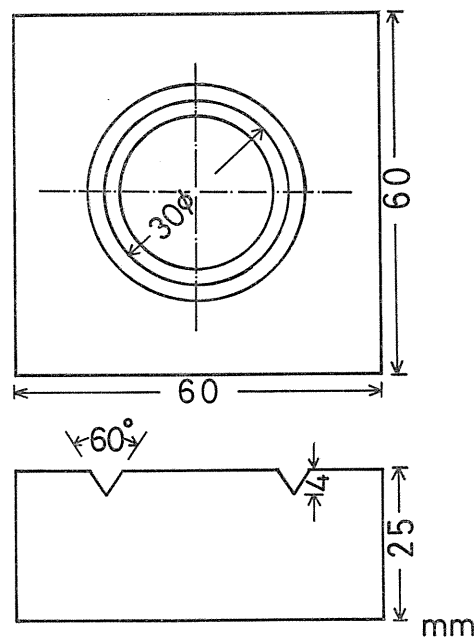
Ni-Cr steel cast specimen for weld metal solidification cracking test.
